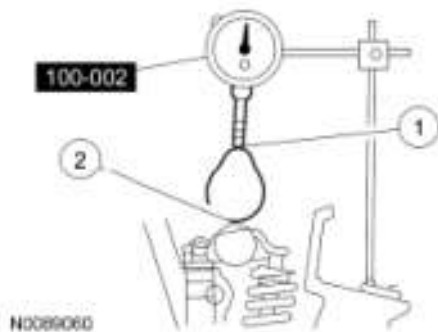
Lifting Of Crankshaft Lobe - Typical Engine With Camshaft Roller Followers
